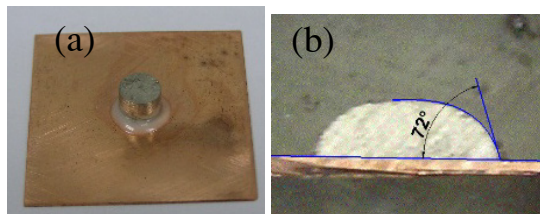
a) Solder on substrate before melting and b) Cross-sectioned specimen after melting
